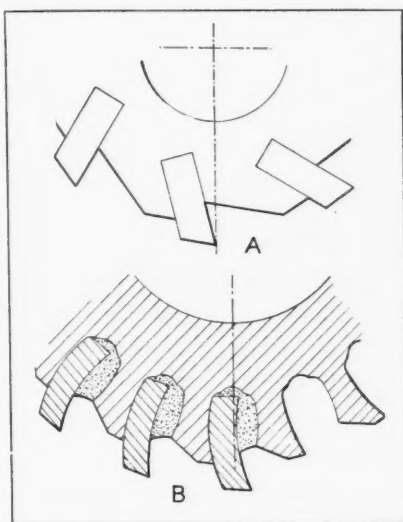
(A) Sweated-in Helical Blade Type of Milling Cutter; (B) Helical Blades secured by Fusible Metal
